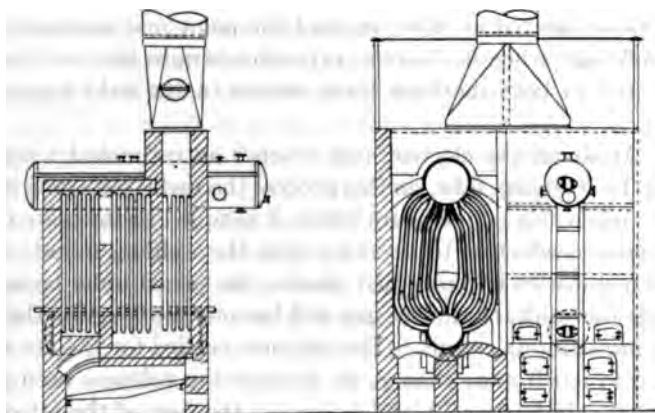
BATTERY OF TWO 100-HP. WATER-TUBE STEAM BOILERS.
